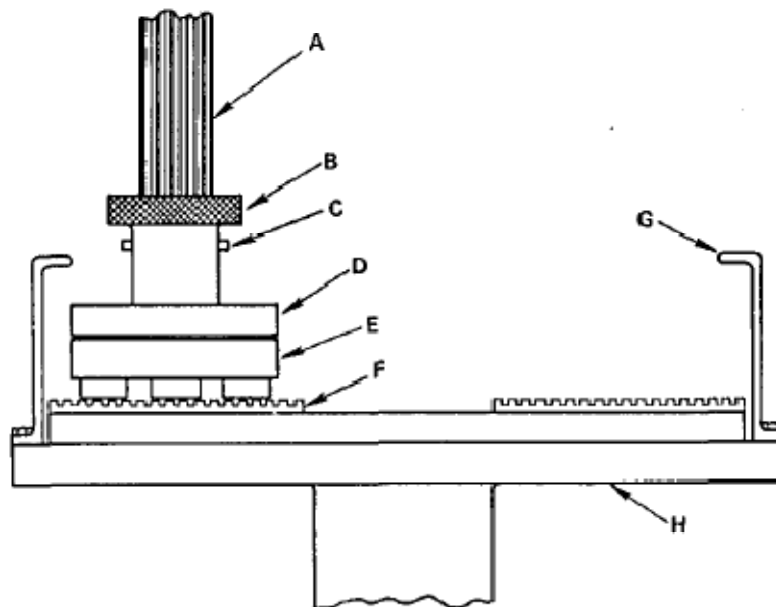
Schematic of float-polishing machine: A, upper spindle-driving spline; B, knurled retaining ring; C, driving pin; D, steel holding and driving fixture; E, glass blocking plate with samples; F, tin lap bonded to stainless steel backing plate; G, bowl for retaining slurry; H, lower spindle-driving plate.[4]
